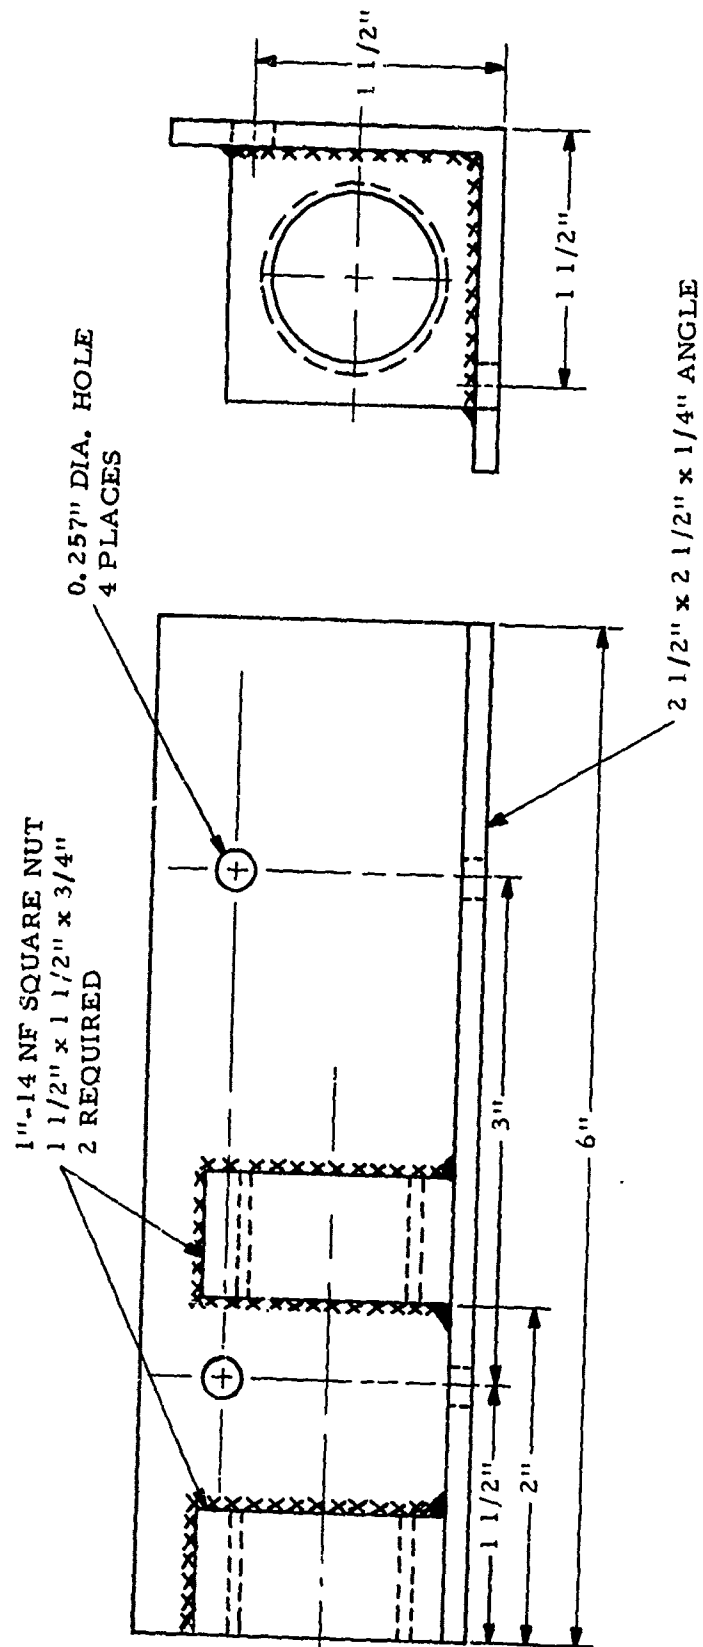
ANGLE IRON BRACKET ASSEMBLY
